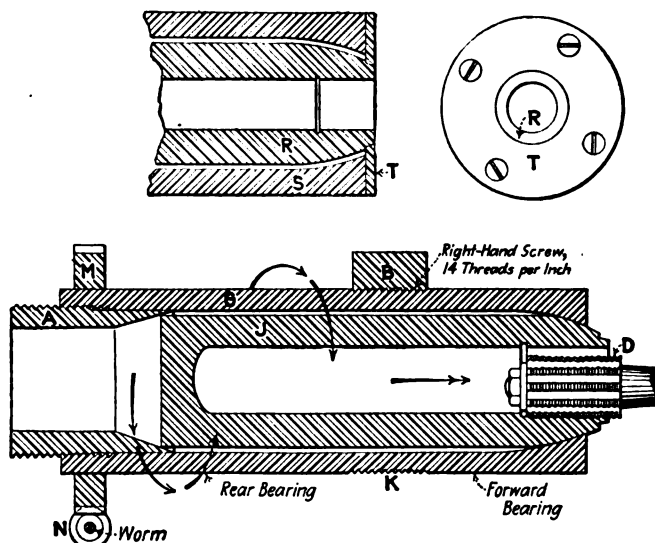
SPINDLE OF NOSE-THREAD MILLER
